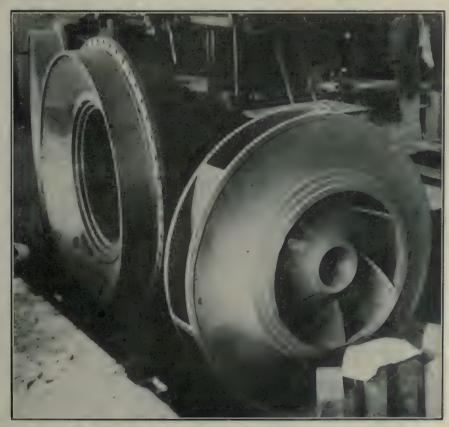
Impeller and Bearings of the Centrifugat Pump after machining, in the works of the John Inglis Co., Toronto.
